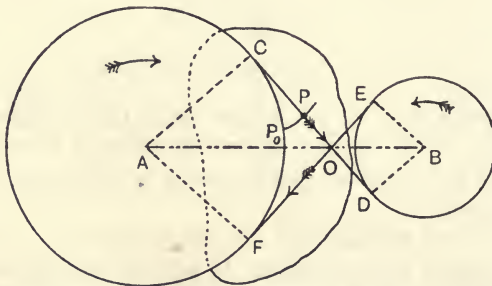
Mechanical construction of an involute to the circle having centre at A.
